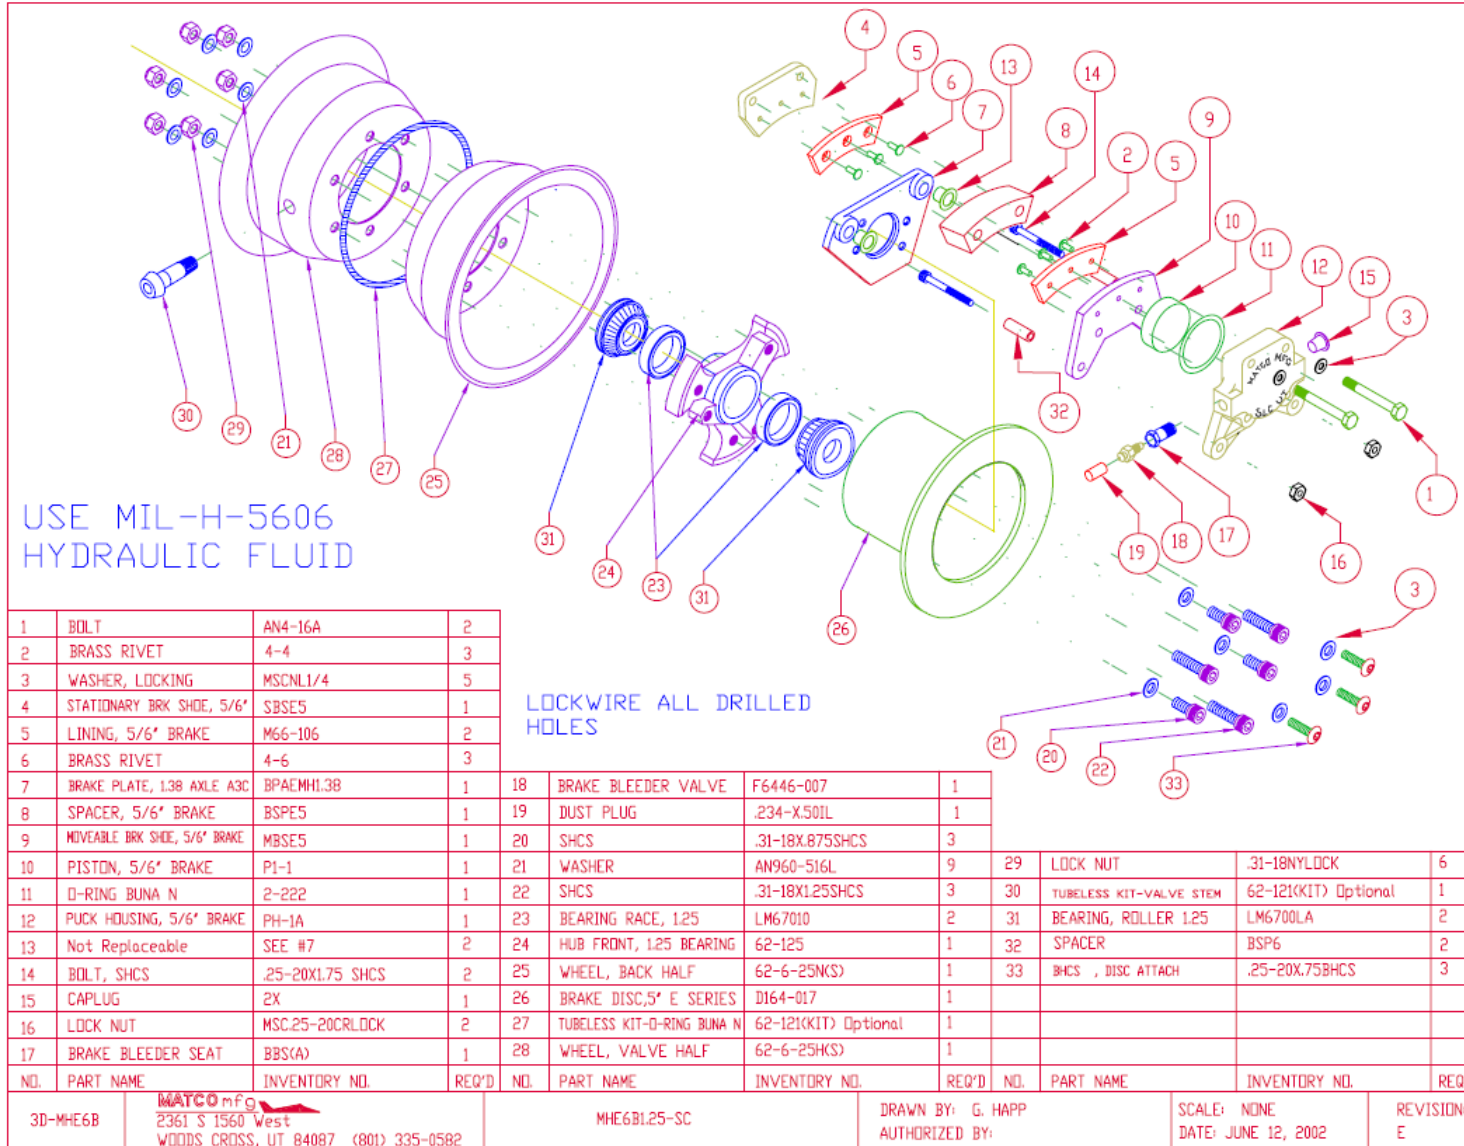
MATCO Wheel hub & calliper assembly drawing
